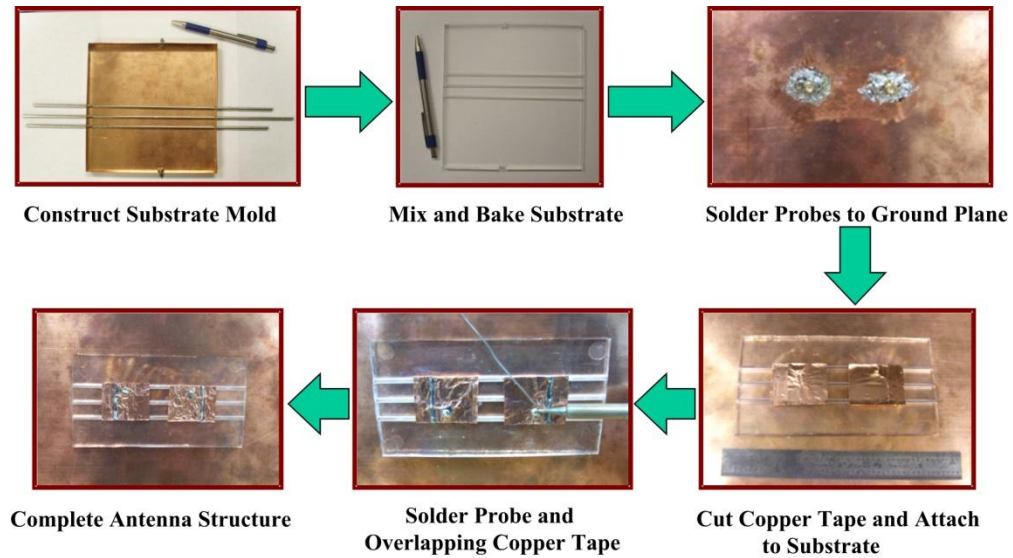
Steps for fabrication of reconfigurable 1x2 patch antenna array.
